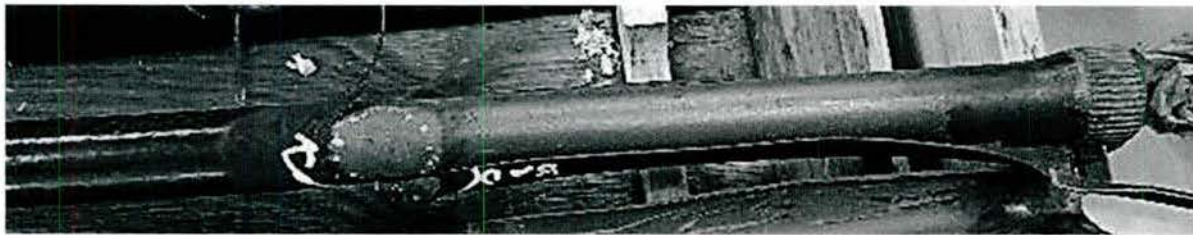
Coating Stripped from Torsion Bar with Hole in Coating
